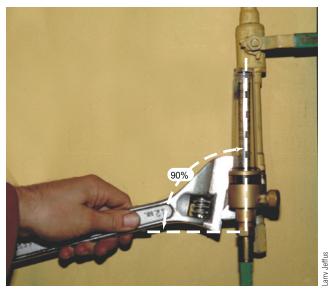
Attach the flowmeter regulator. Be sure the tube is vertical.
